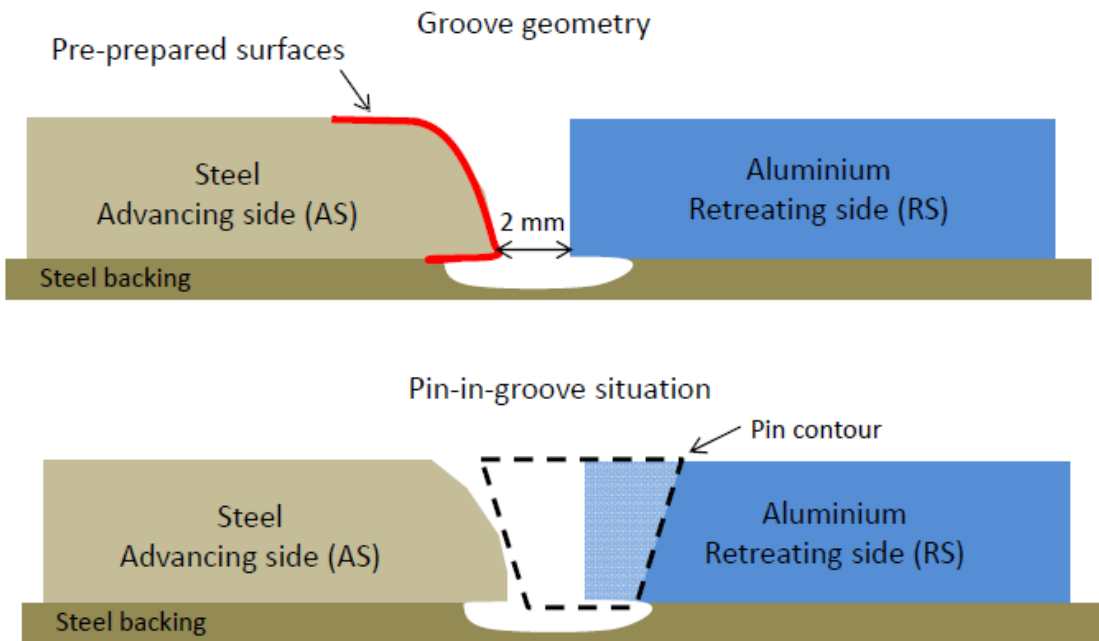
HYB on dissimilar welding, last configuration; Ø.Grong, Personal Communication
